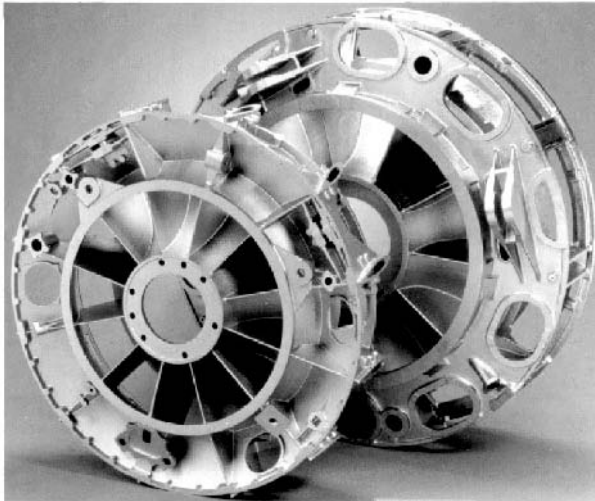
Investment cast frames for aircraft engines (courtesy GE Aircraft Engines)
